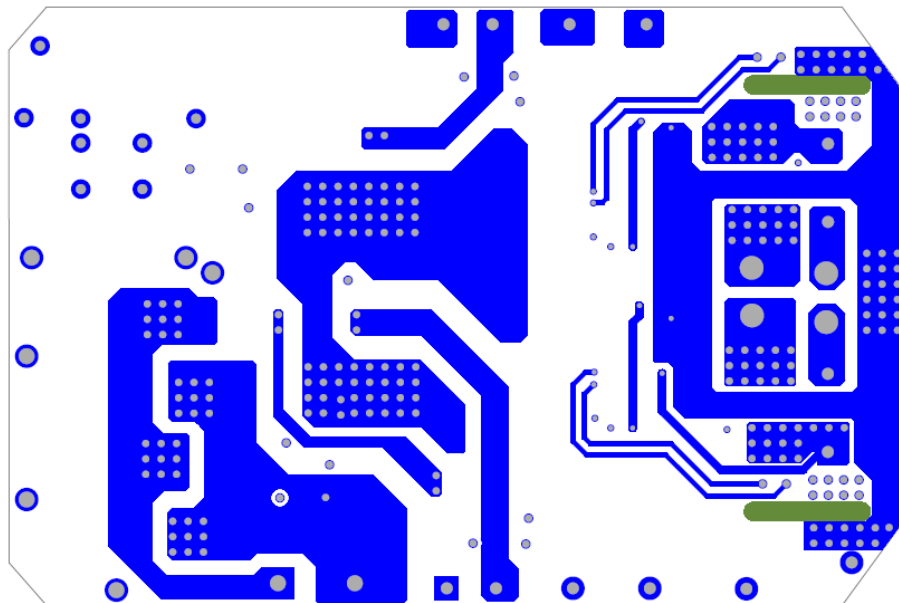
DER-1024 Mother Board Rev B Printed Circuit Layout (Inner Layer 1).
